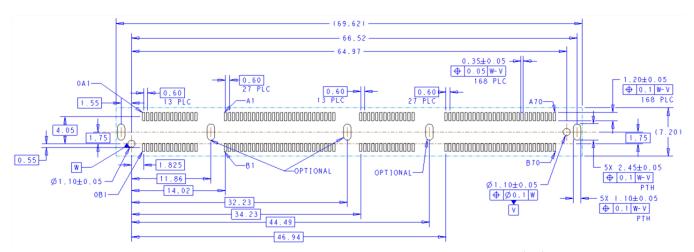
4C+ STRAIGHT CONNECTOR FOOTPRINT (MM)
